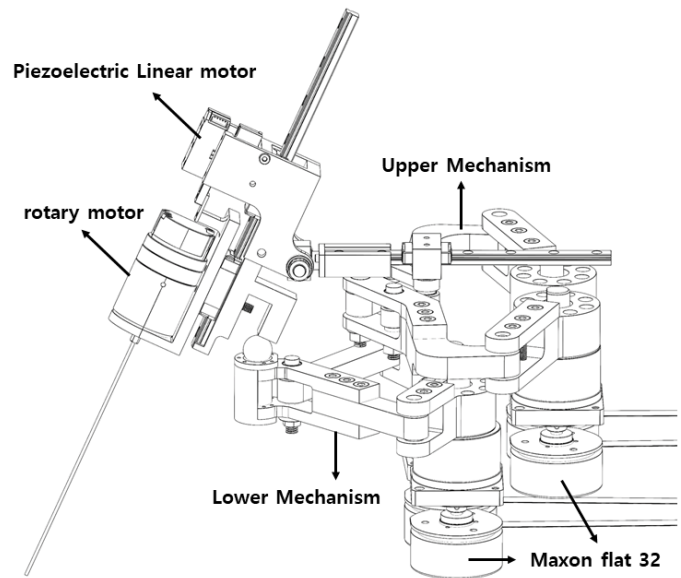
The hardware design of the proposed double-layer 5-bar mechanism.
